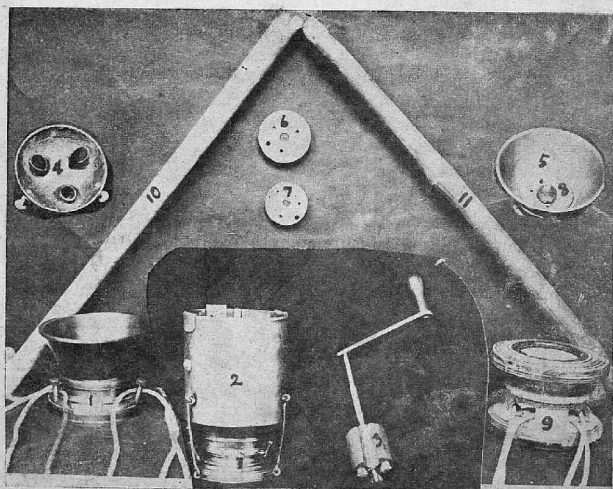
PLATE II. PARTS OF THE ALL METAL SEED-HOPPER
